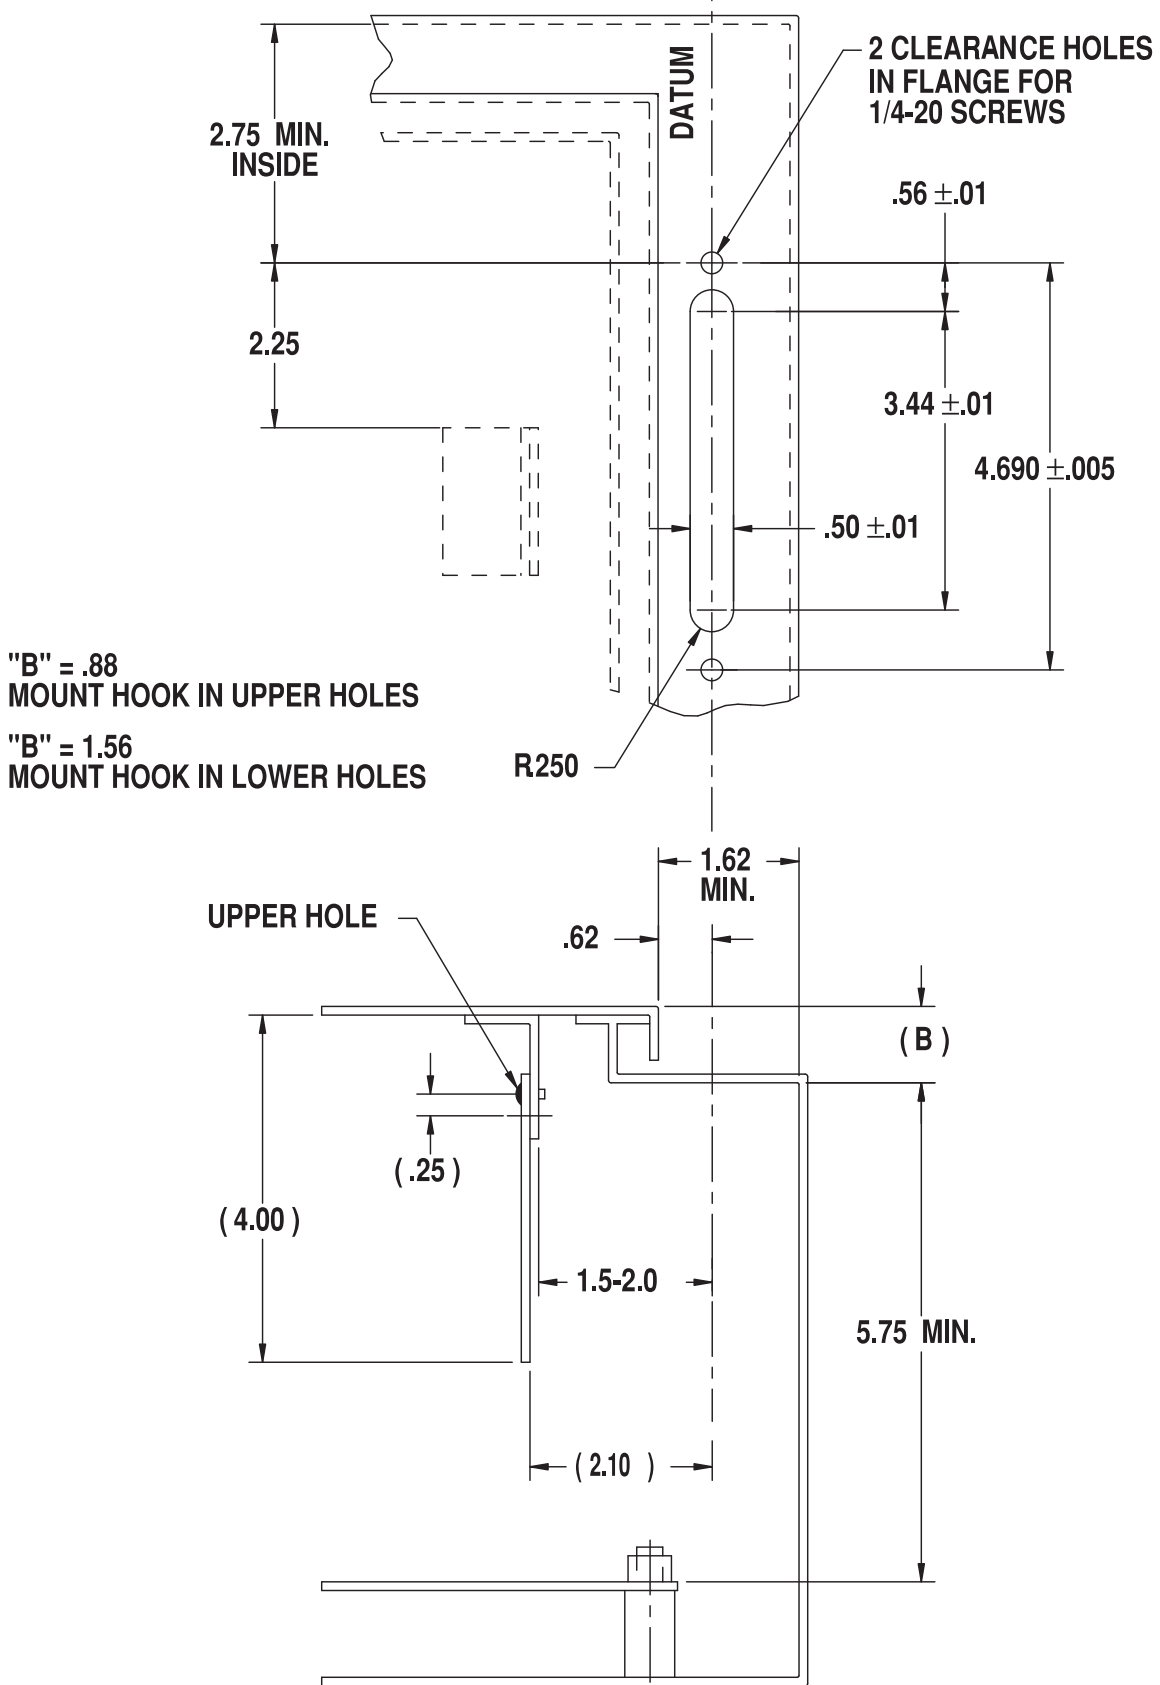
Flange Drilling Plan for Handle and Interlock Blade Mounting Dimensions
